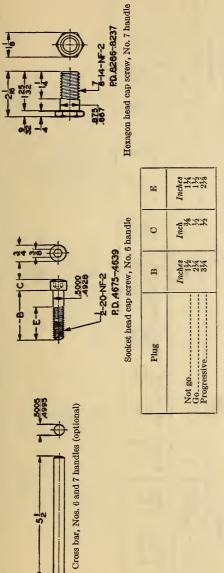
Plain cylindrical plug gage handles, reversible design, range above 1.510 to and including 4.510 inches
